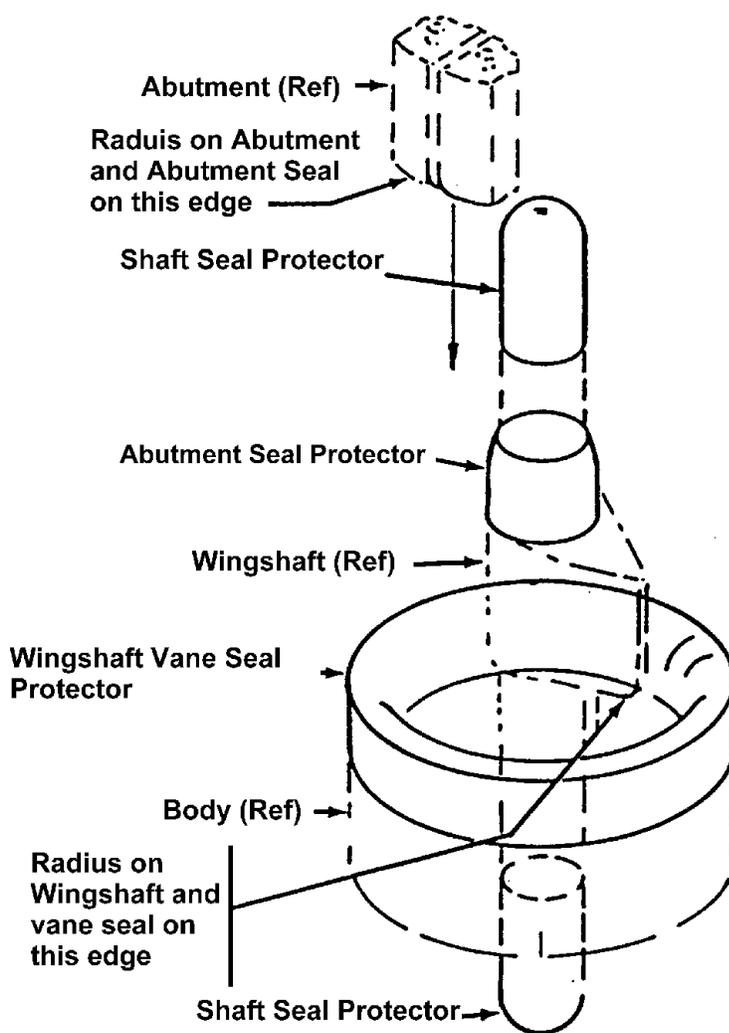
Special Assembly Tools Used to Protect Seals. See Table IV on Page 6 for Part Numbers.
